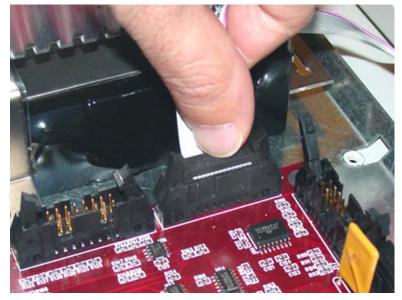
Connect the Wireway Cable to J10 of the PowerCom3 Board
